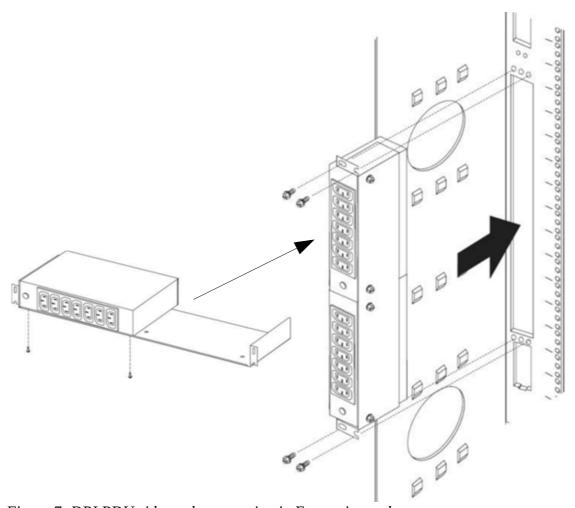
DPI PDU side pocket mounting in Enterprise rack
